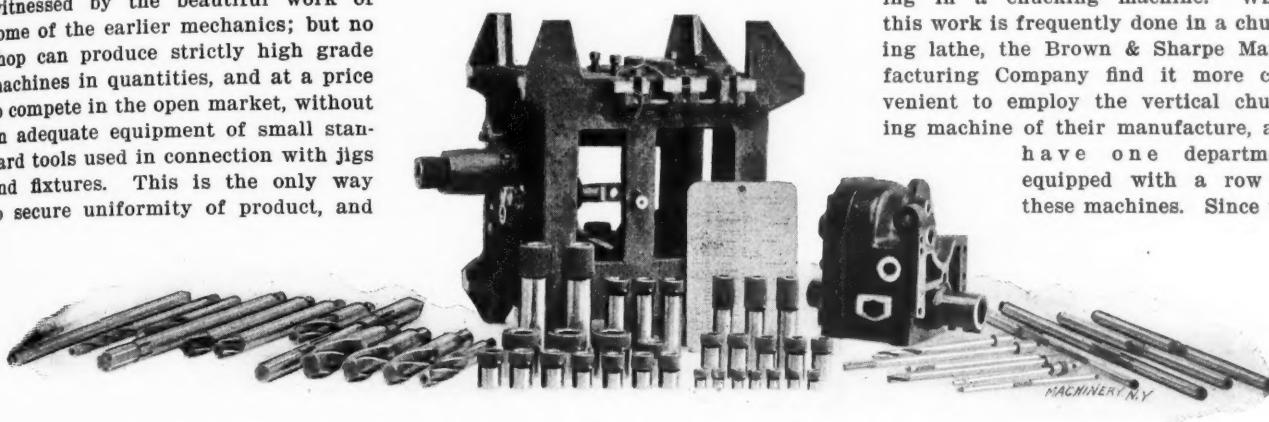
Jig and Tools for Drilling Feed Gear Case for an Automatic Gear Cutting Machine.
